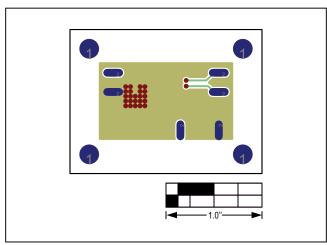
MAX5048C EV Kit PCB Layout—Solder Side
